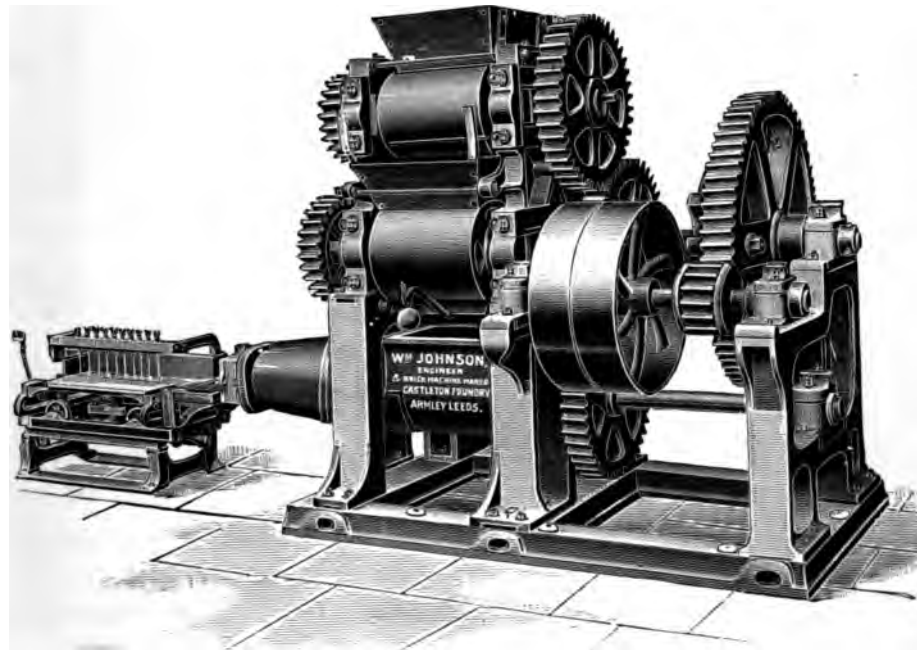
Screw Machine with Rollers and Distributing Cylinders (Johnson).
